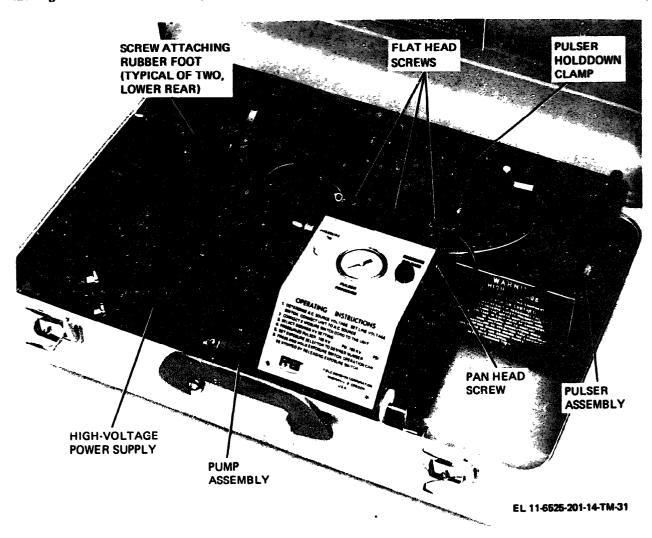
Pulser Chasm Mounted in Inner Carrying Case.
